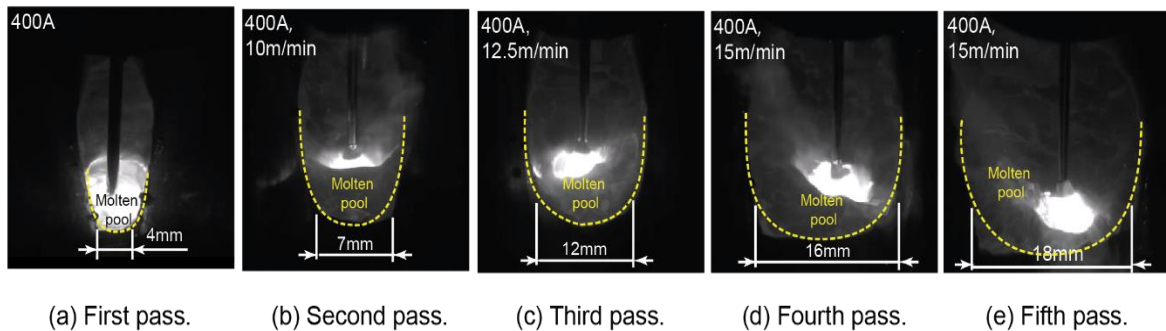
High-speed images of molten pool on each pass during welding.
